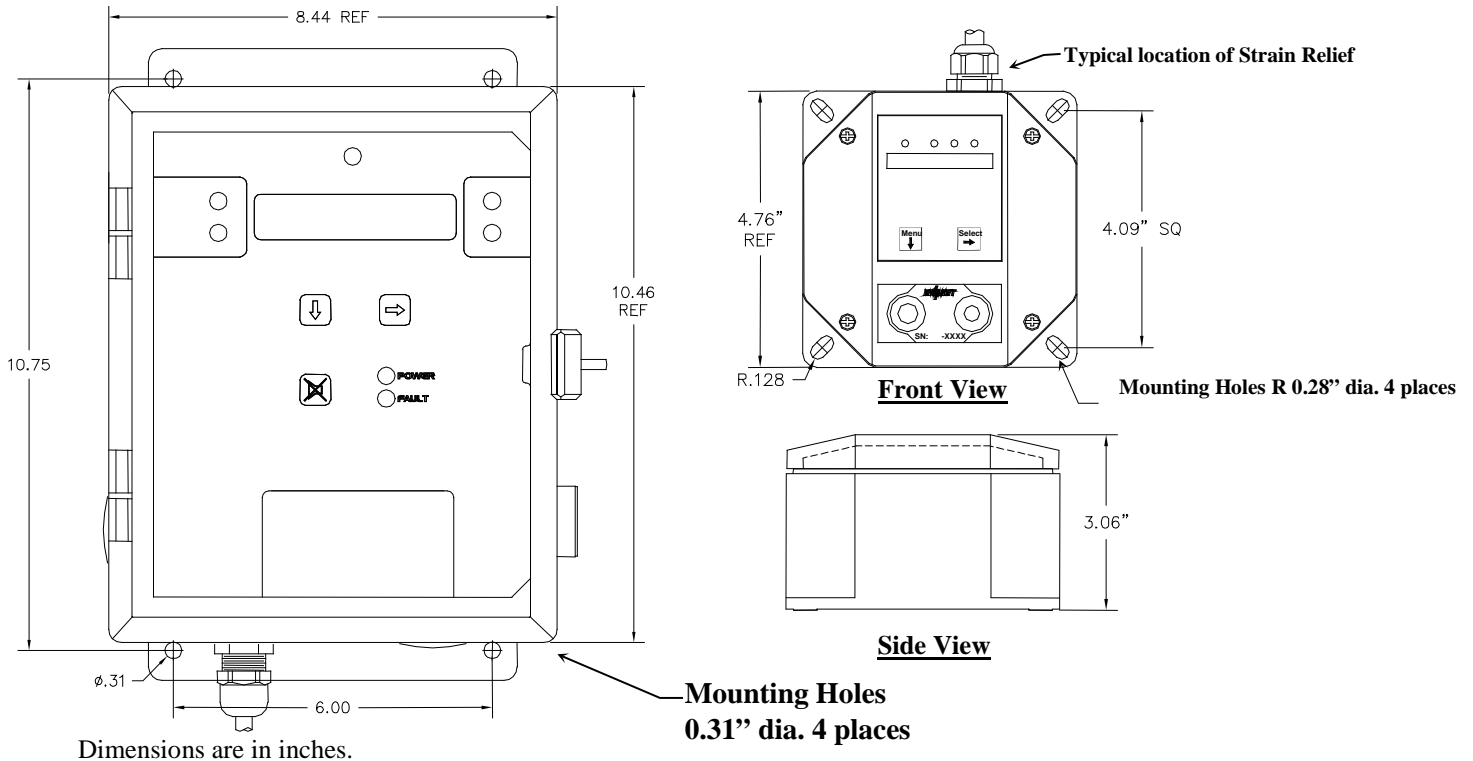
ISA-60M Control & MRI-5175 Remote Sensor Mounting Dimensions
